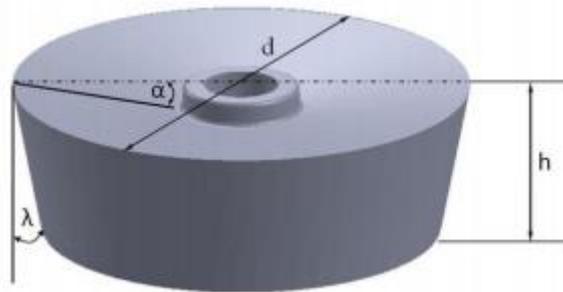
Tool geometry model ( $d$ =tool diameter,  $h$ =tool thickness,  $\alpha$ =rake angle,  $\lambda$ =clearance angle)
